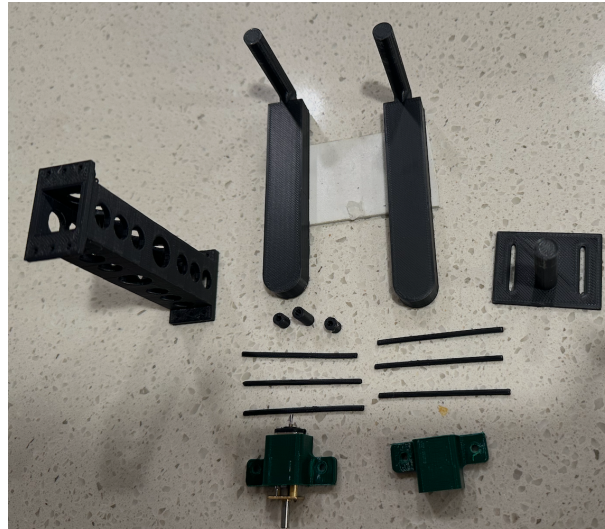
3D printed motor mounts and couplers designed for FDM manufacturing.
